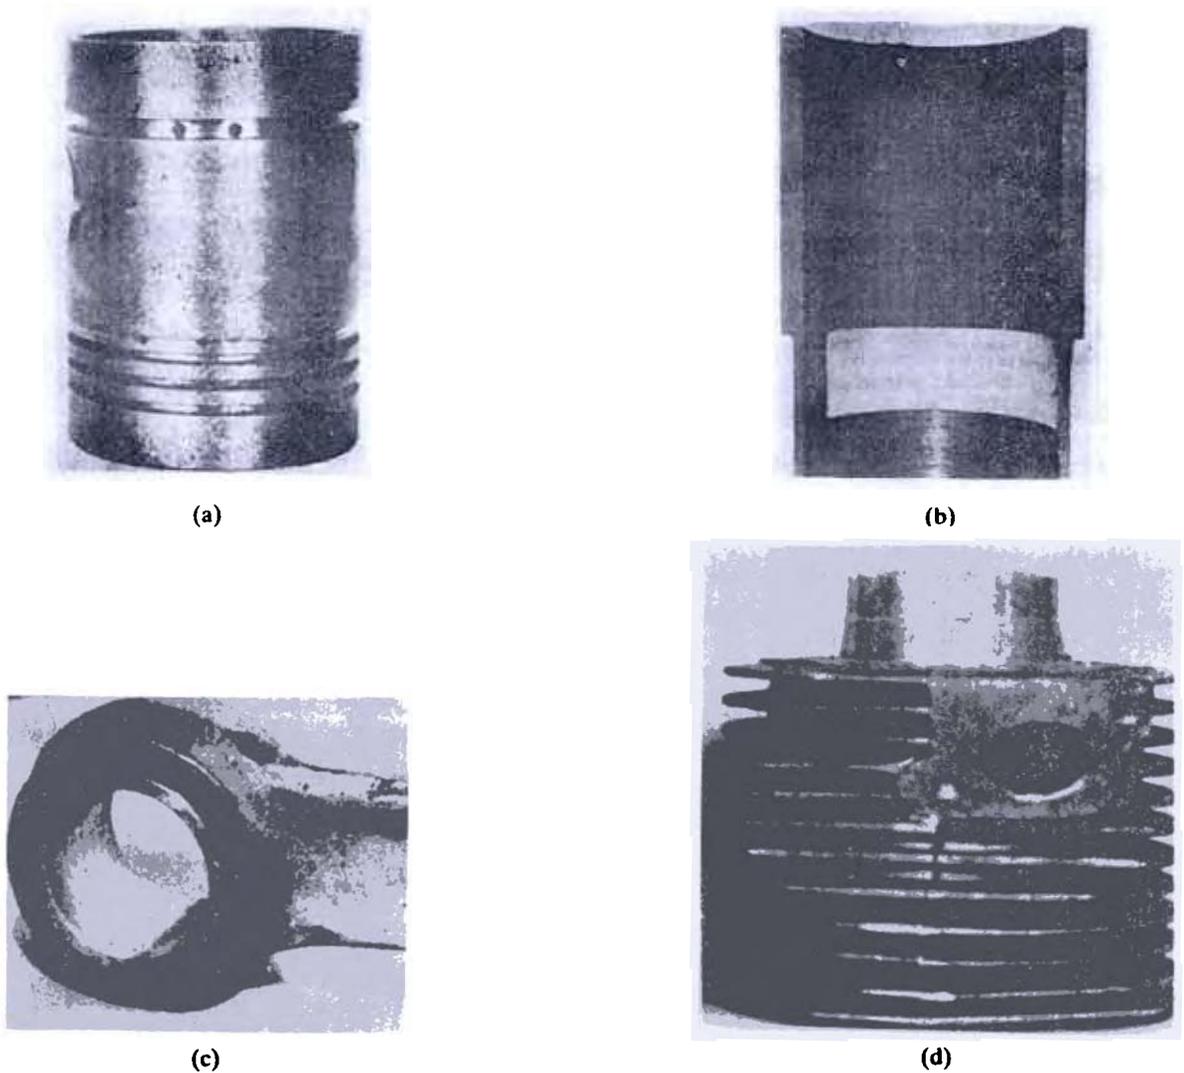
Various engineering components of cast MMCs : (a) IC engine piston (*Al-Si-Gr* composite), (b) *Al-Si-Gr* composite cylinder liner, (c) connecting rod, and (d) cylinder block.
